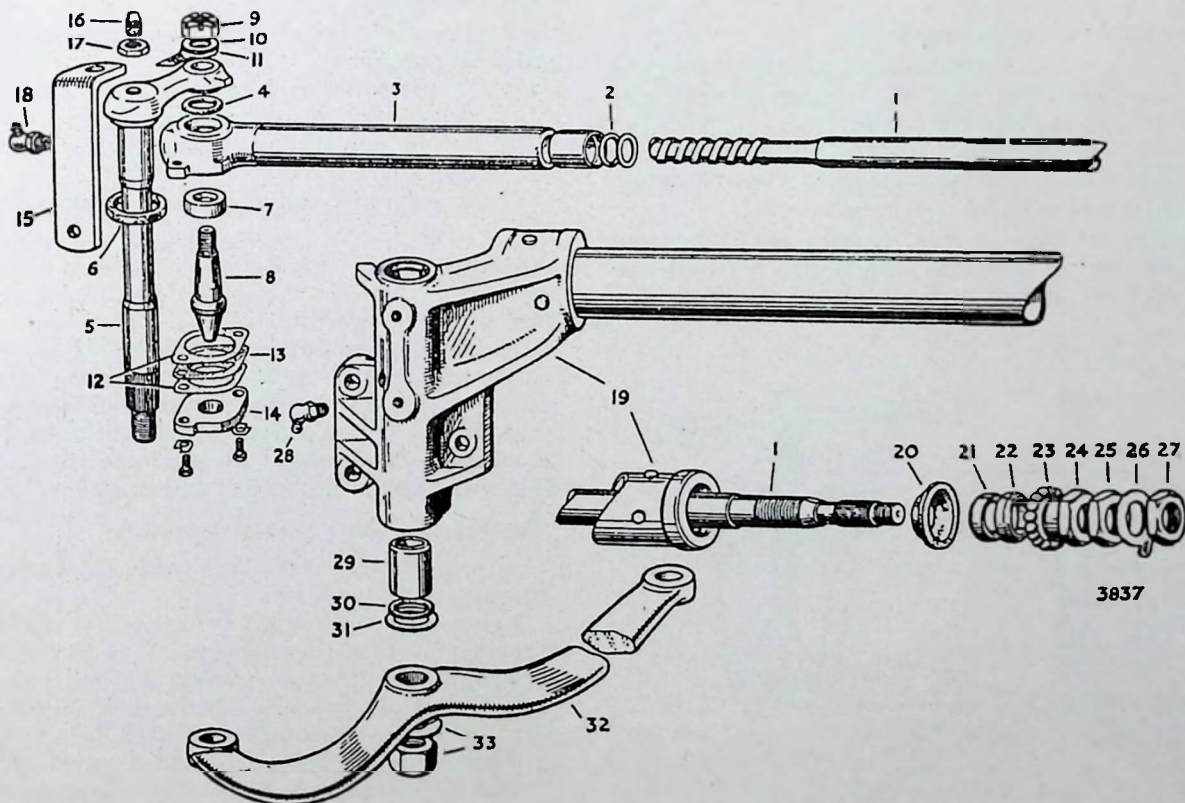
Exploded view of the Burman "P" type steering gear.
